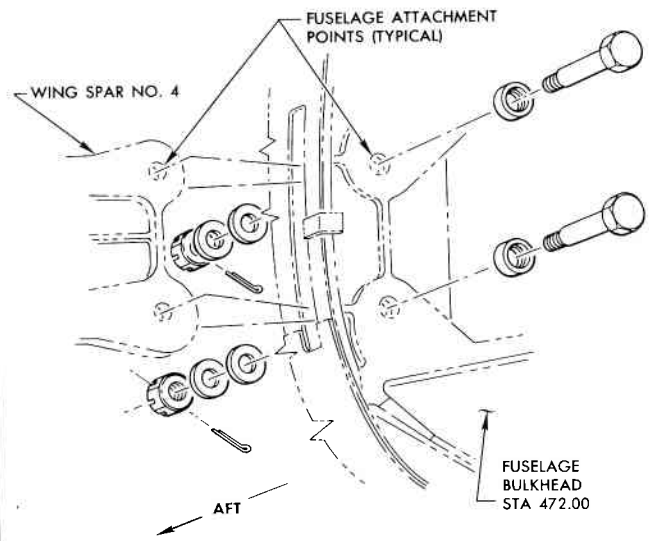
Wing Replacement (Sheet 4 of 5)
